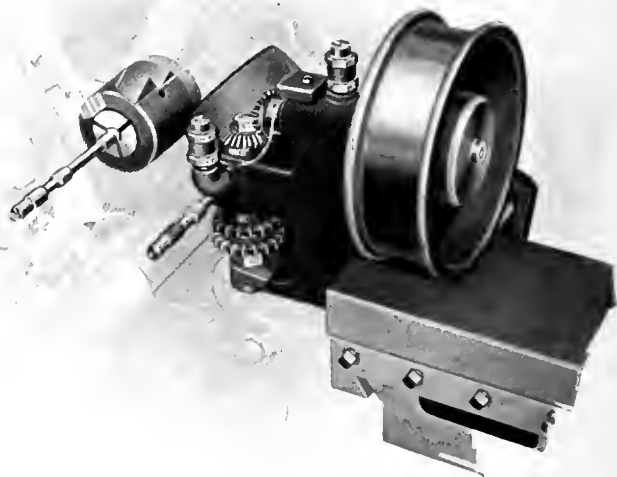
An Attachment which enables Work to be milled in the Automatic Screw Machine, thus eliminating a Second Machining Operation
